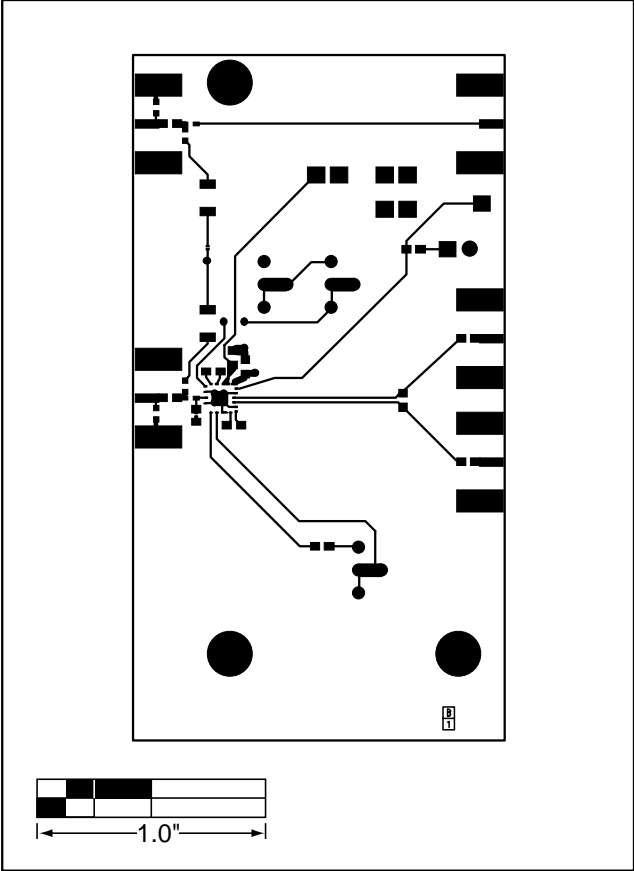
MAX3866 EV Kit PC Board Layout—Component Side
